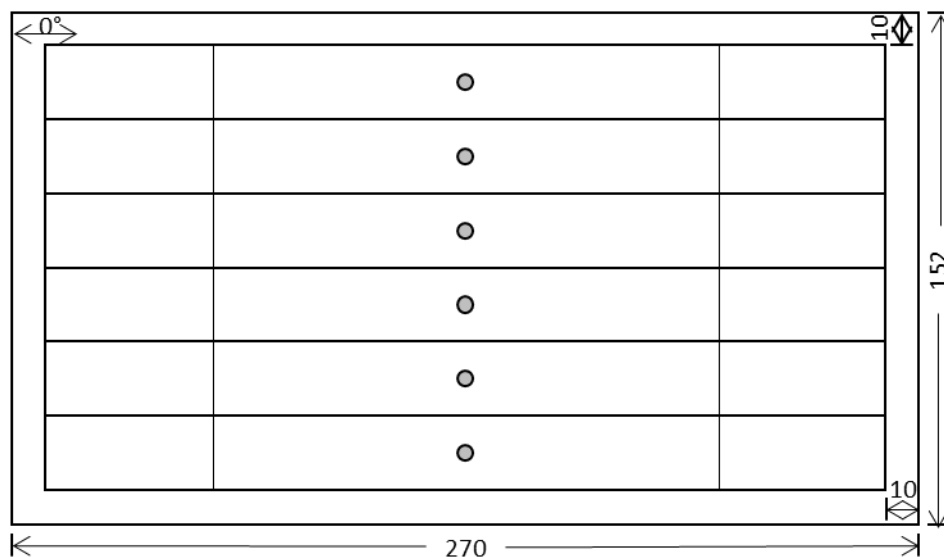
Positioning of the coupons on the test panels for filled hole tensile test. All dimensions are expressed in mm.
